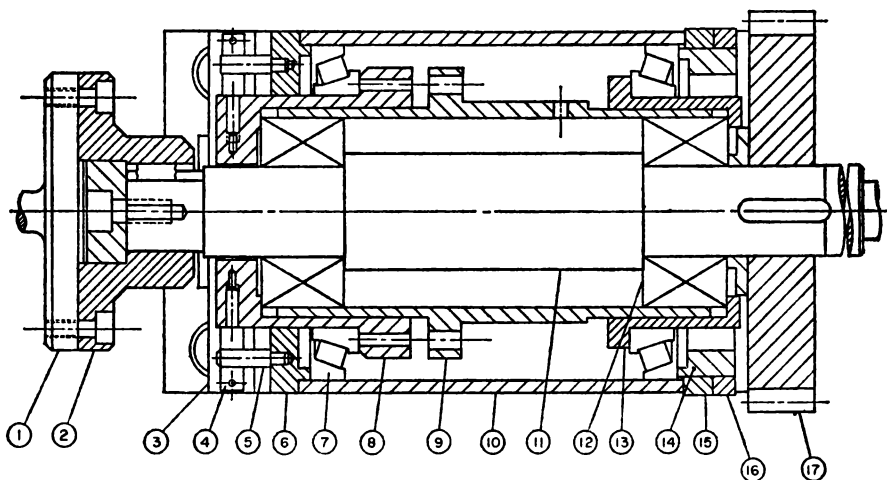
Schematic of a cross-section of a gear housing subassembly.
